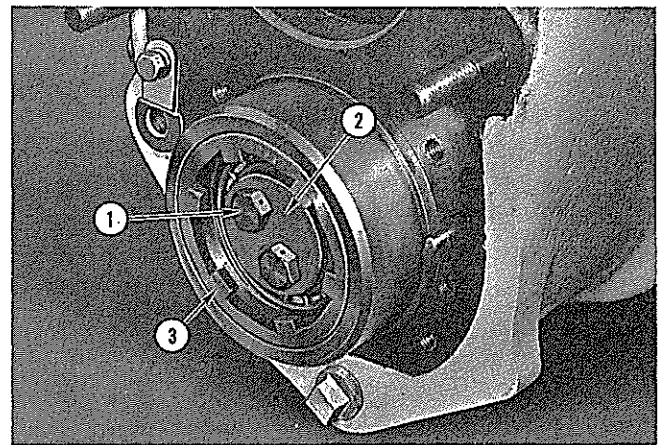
RETAINING PLATE AND CAPSCREWS
